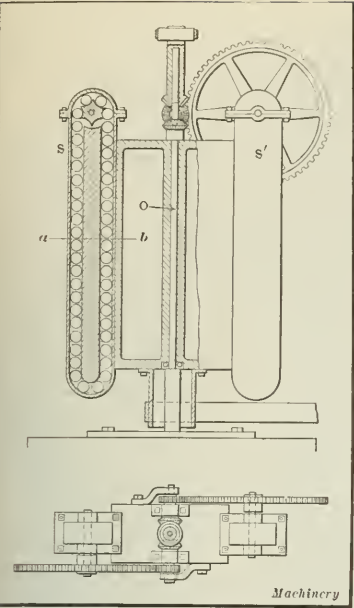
Part Sectional and Top Views of Perpetual Motion Machine
